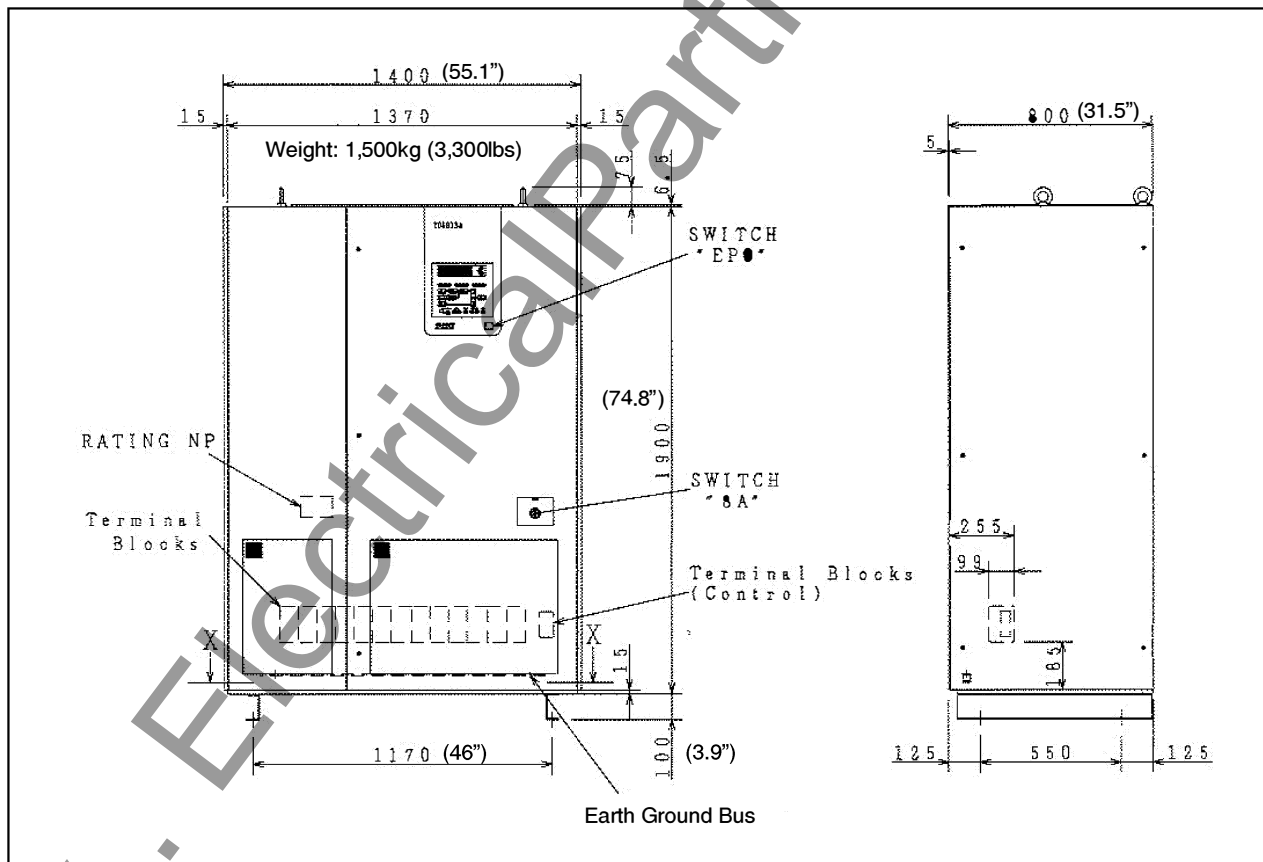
150 & 225kVA UPS Exterior dimensions (front & right side)
